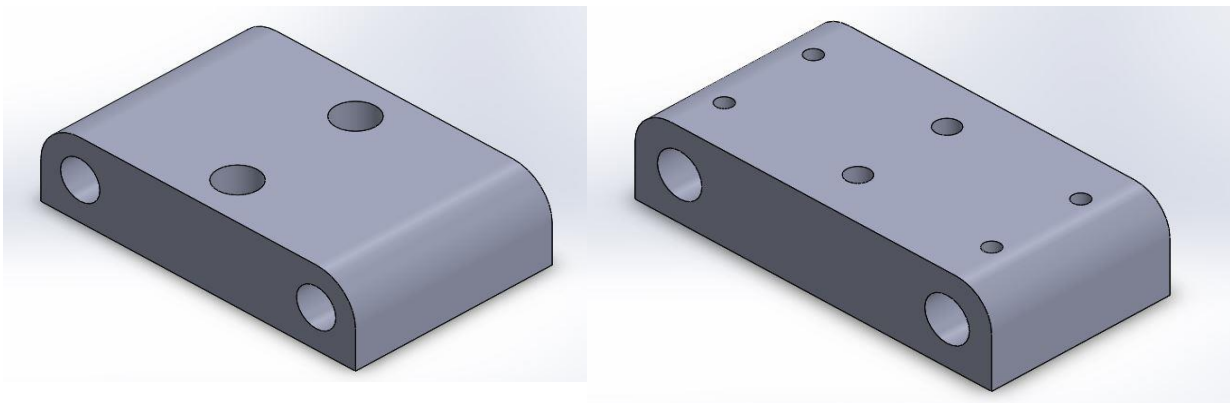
Mounting block design 1 (left) and Mounting block design 2 (right)
